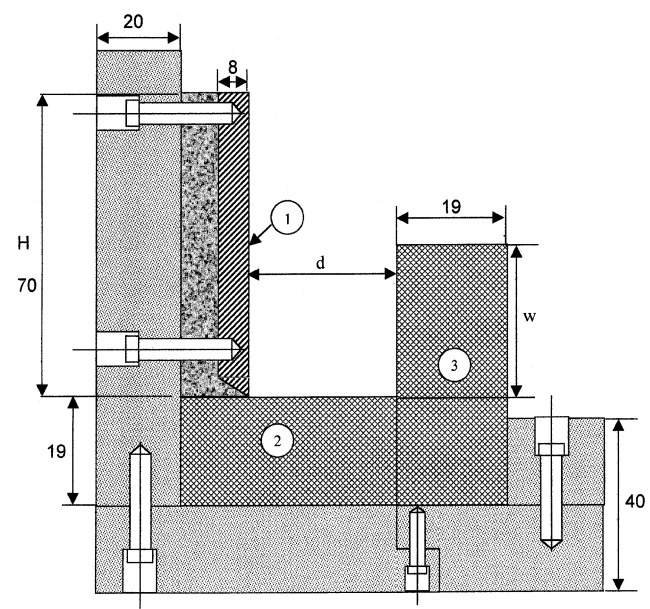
Sectional view of the test cell (1 – left wall, 2 – bottom wall, 3 – right wall). All dimensions shown in the figure are in mm.
